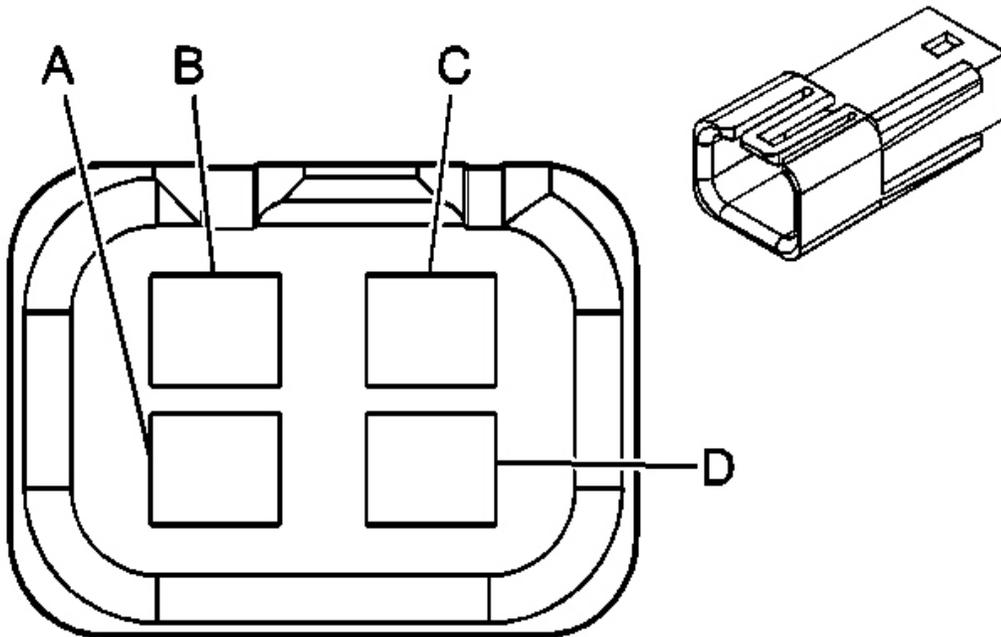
Heated Seat Element - Passenger Cushion Connector End View
